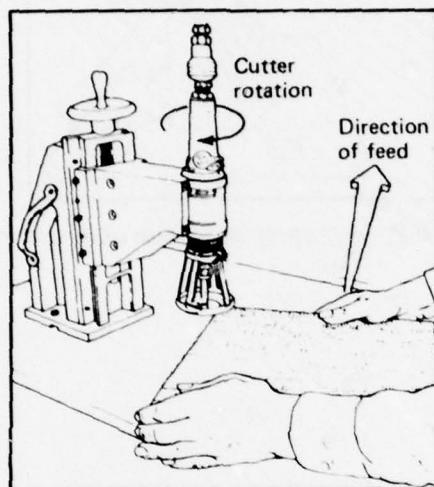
Honeycomb-Core-Slicing Equipment
